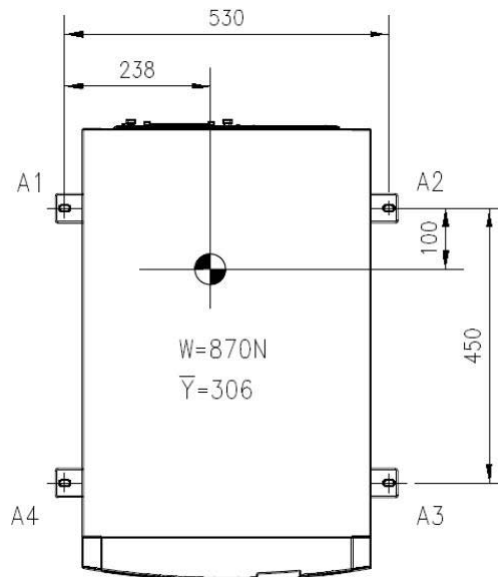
Seismic NIO16 Console Mounting Hole Locations
